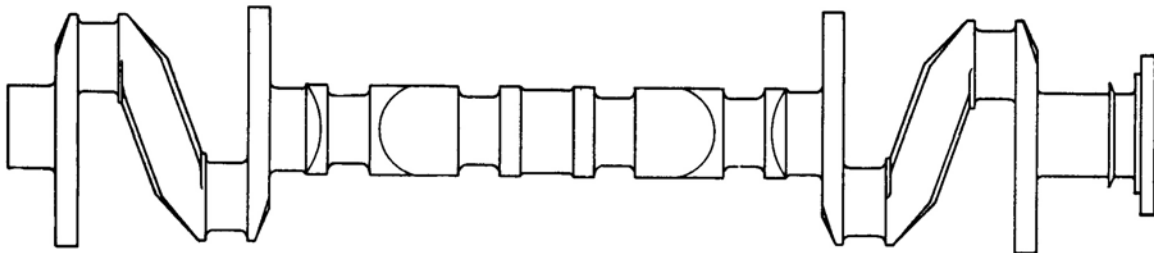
Five bearing crankshaft for eight cylinder crankshaft in line engine
